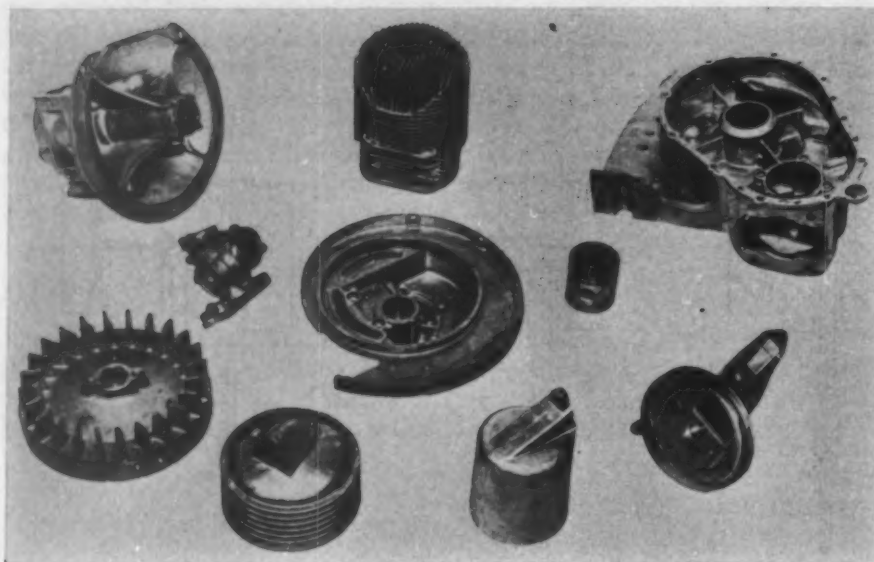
Left—Group of aluminum-alloy diecastings used in McCulloch gasoline engines
